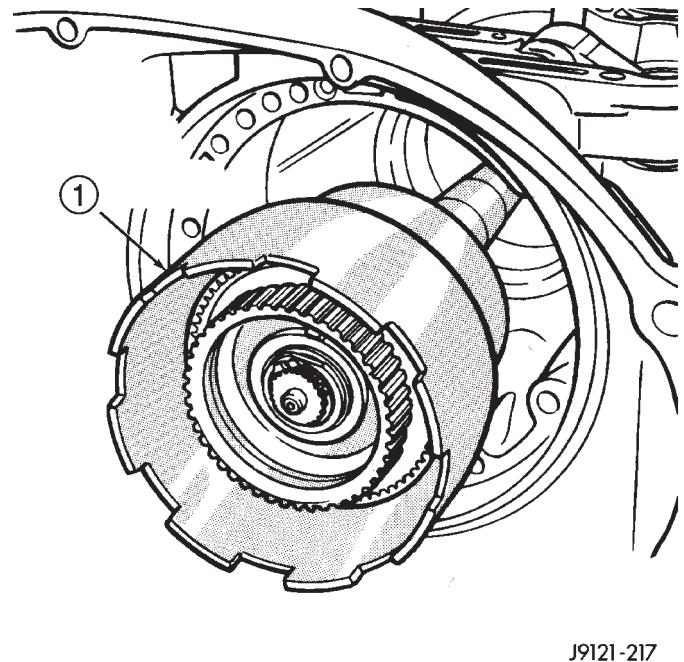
Installing Low-Reverse Drum Retaining Snap-Ring
